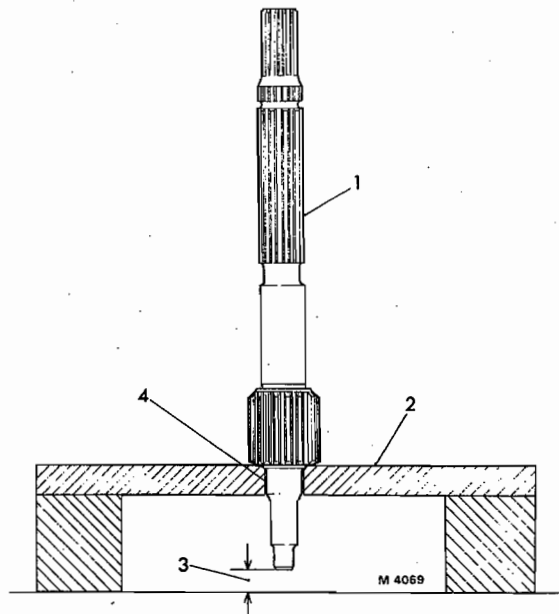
THE INPUT SHAFT IN A SUITABLE STAND
